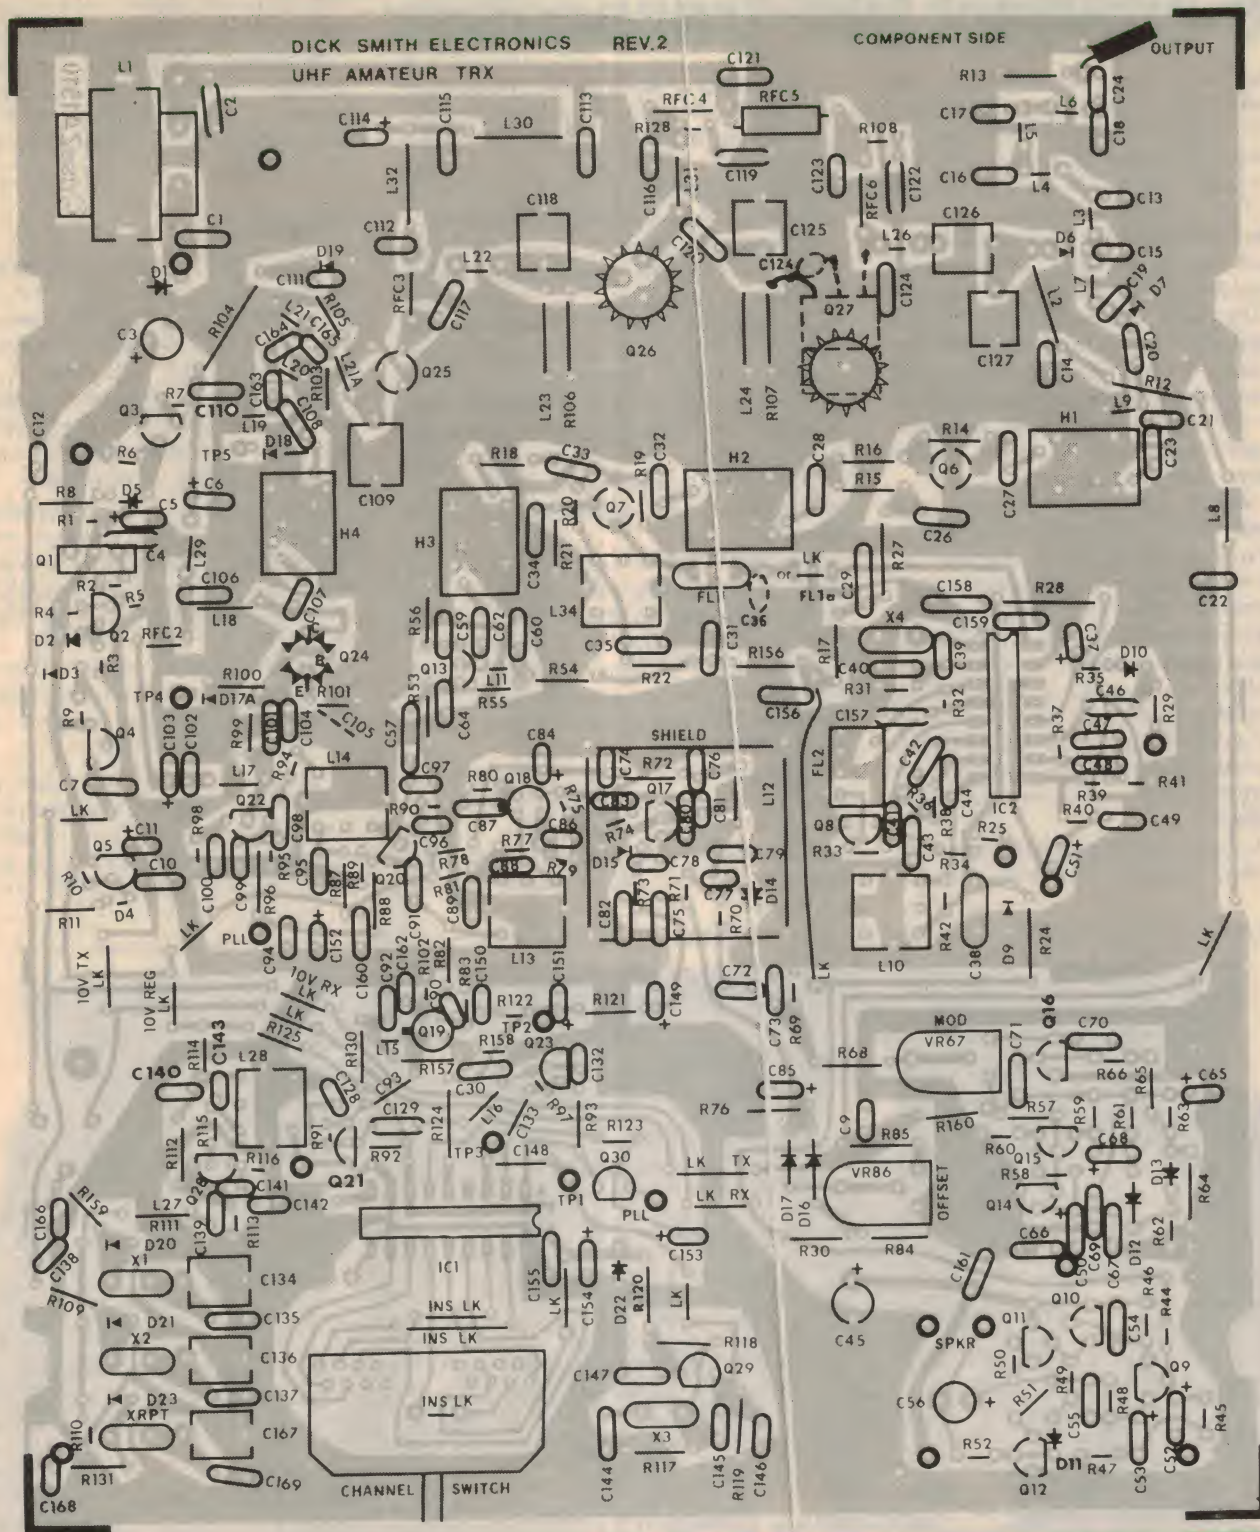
parts location diagram for the main PCB. Mount the parts in the order indicated in the parts list
